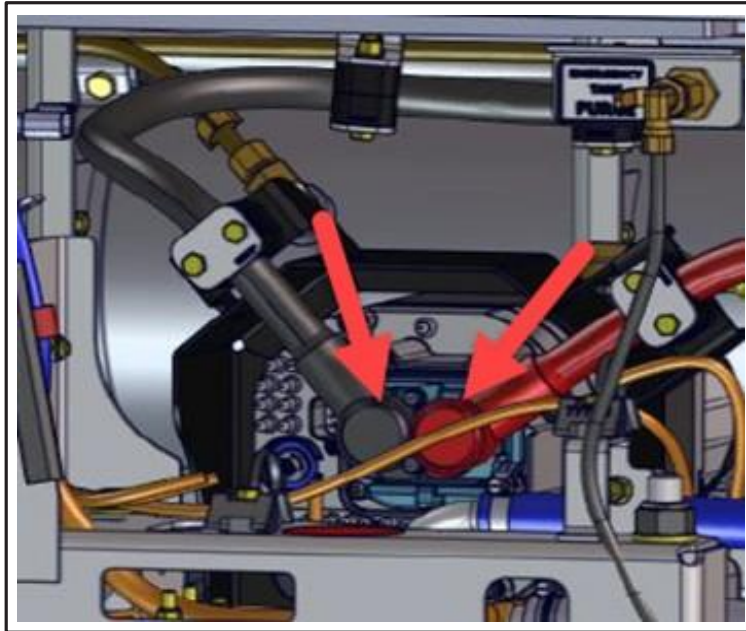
View of E-Steering Motor Positive and Negative Cables
